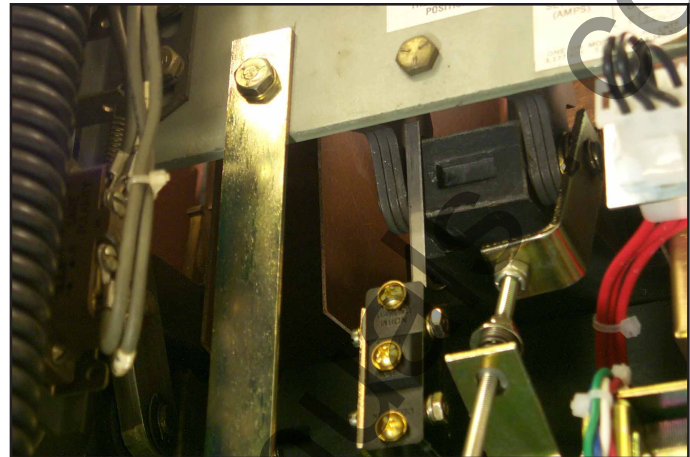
Correct Positioning of the DTA Assembly Front Mounting Bracket and Auxiliary Switch Arm.
